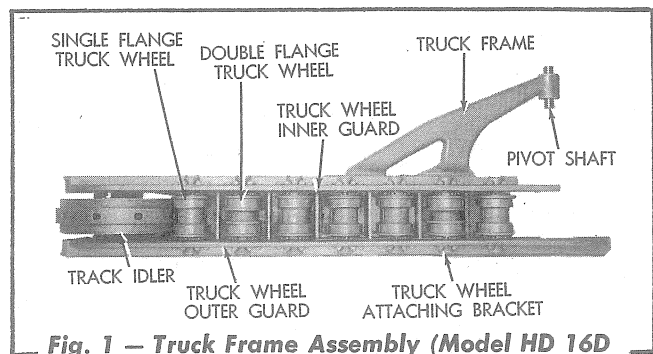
Truck Frame Assembly (Model HD 16D, HD 16DC, and HD 16FC Tractors)
